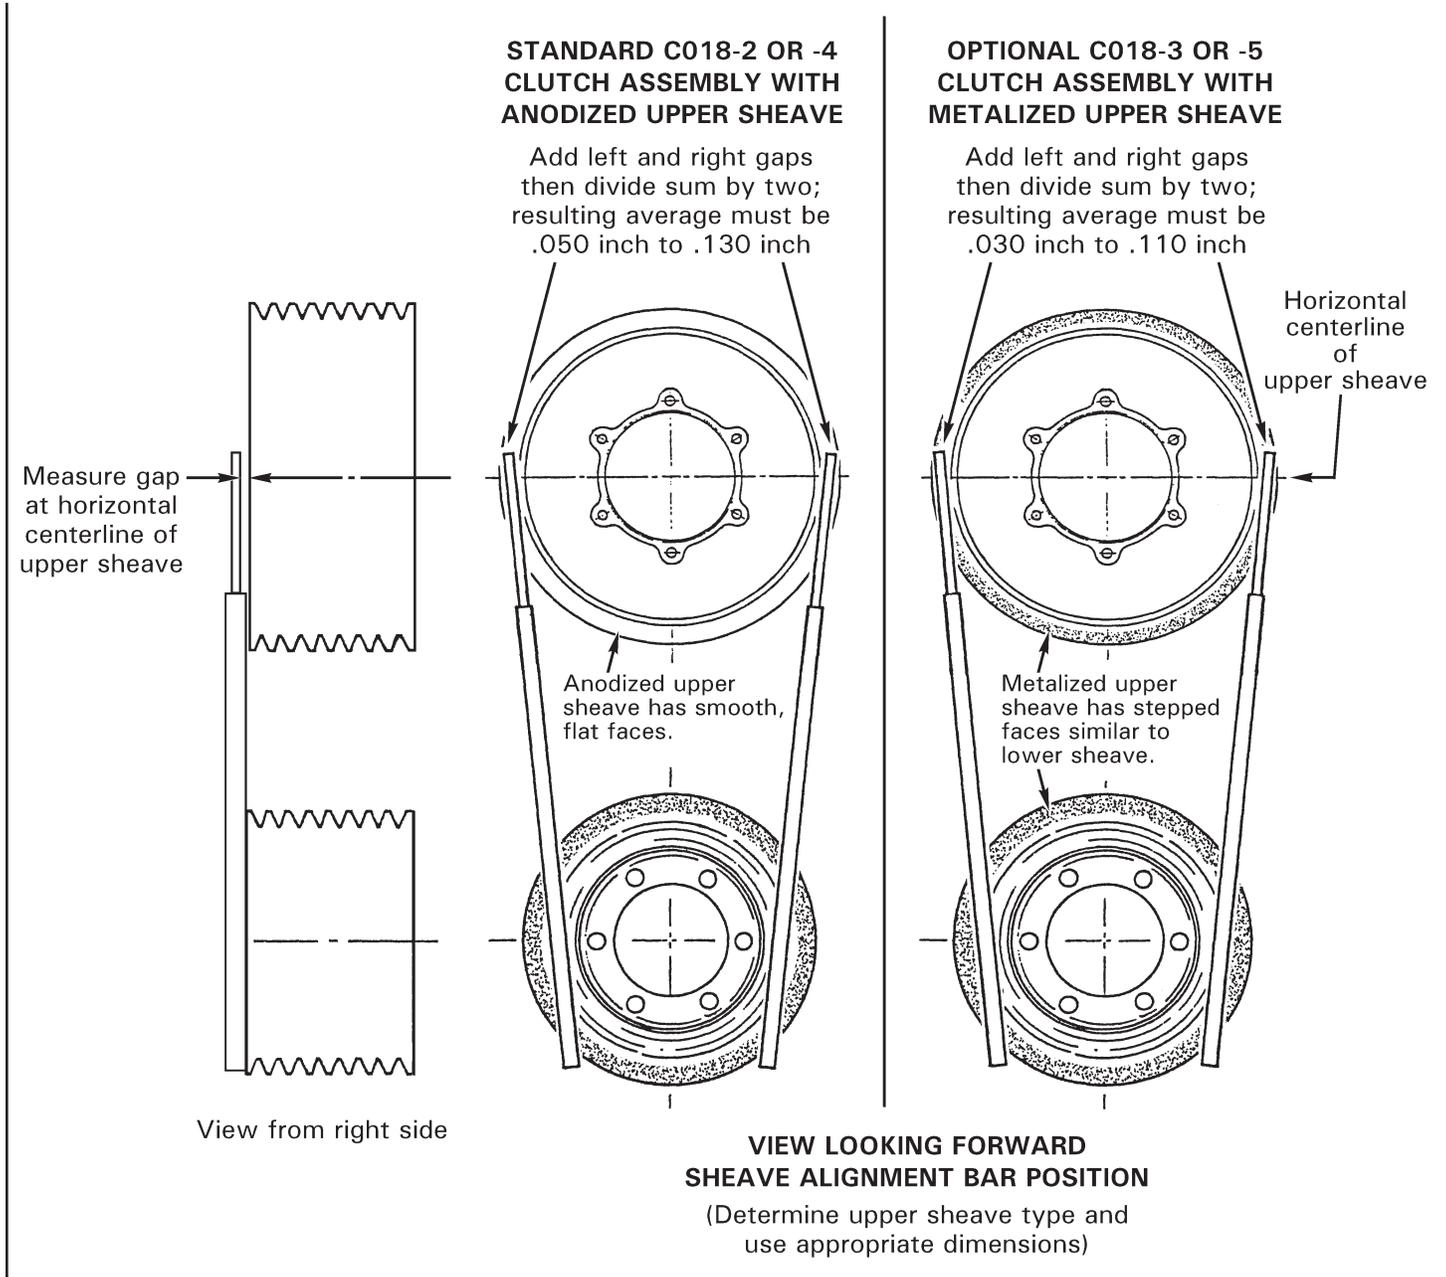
SHEAVE ALIGNMENT DIMENSIONS
